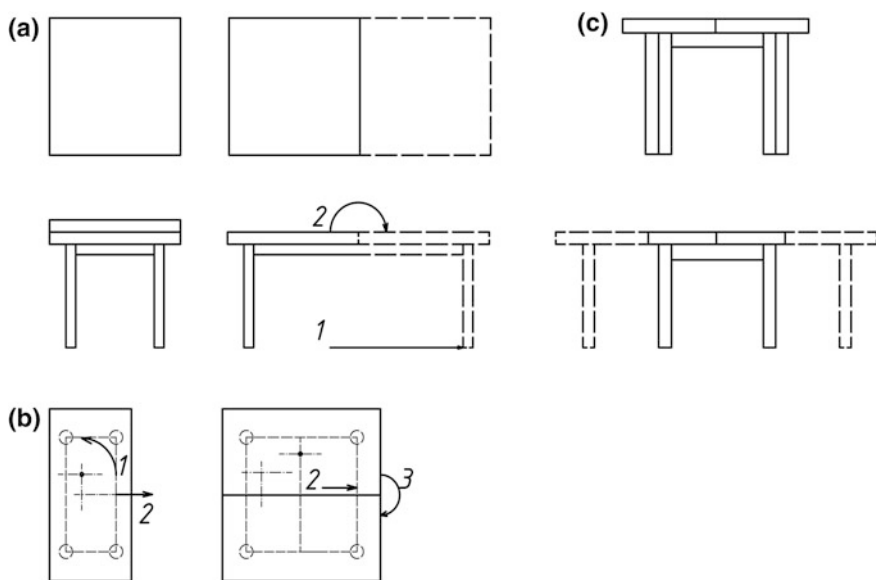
Tables with moving boards supported on extended rails, a two-piece board, b two-piece board—turning, c two-piece board with inserts; 1, 2, 3—the sequence of actions when unfolding the table
